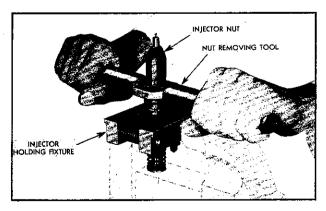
Removing Injector Nut with Tool J-1238 and J-1261.
